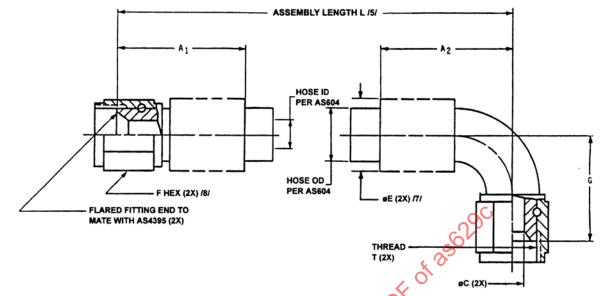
HOSE AND FITTING DIMENSIONS
